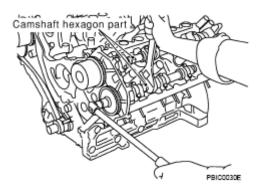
Identifying Camshaft Sprocket Bolt Courtesy of NISSAN MOTOR CO., U.S.A.
